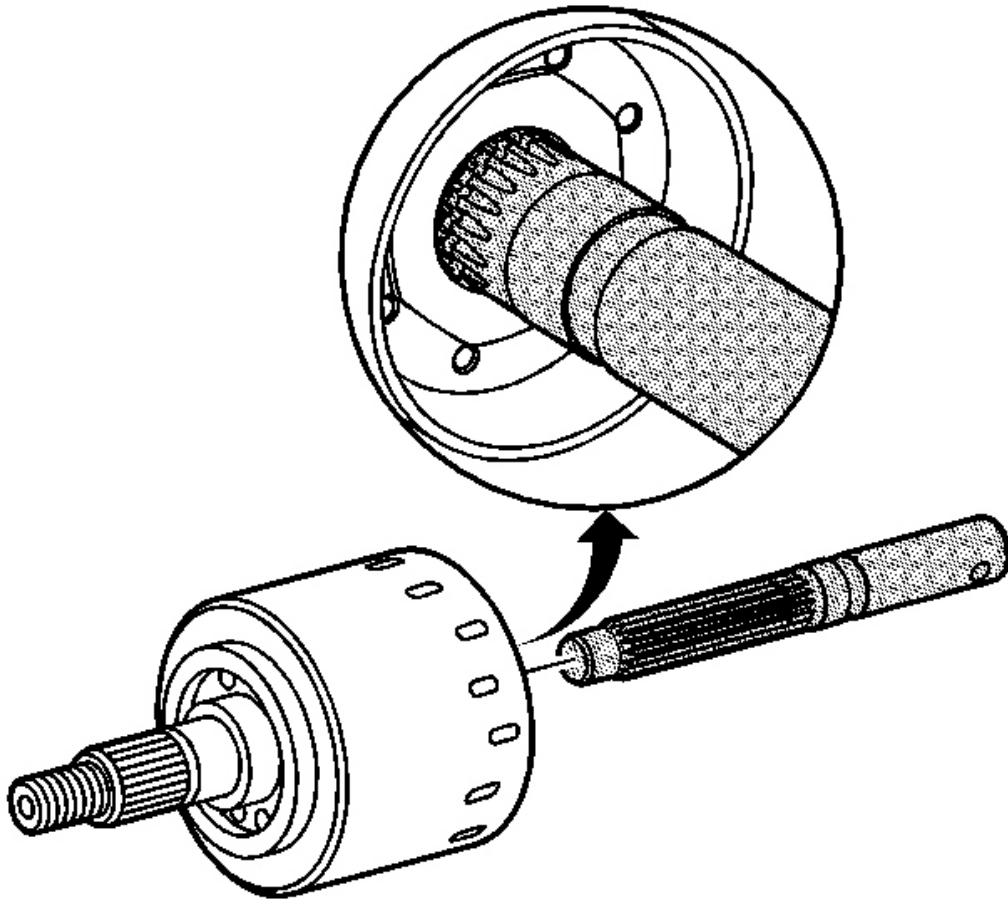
Aligning Clutch With The Pump & Pump Bushing
